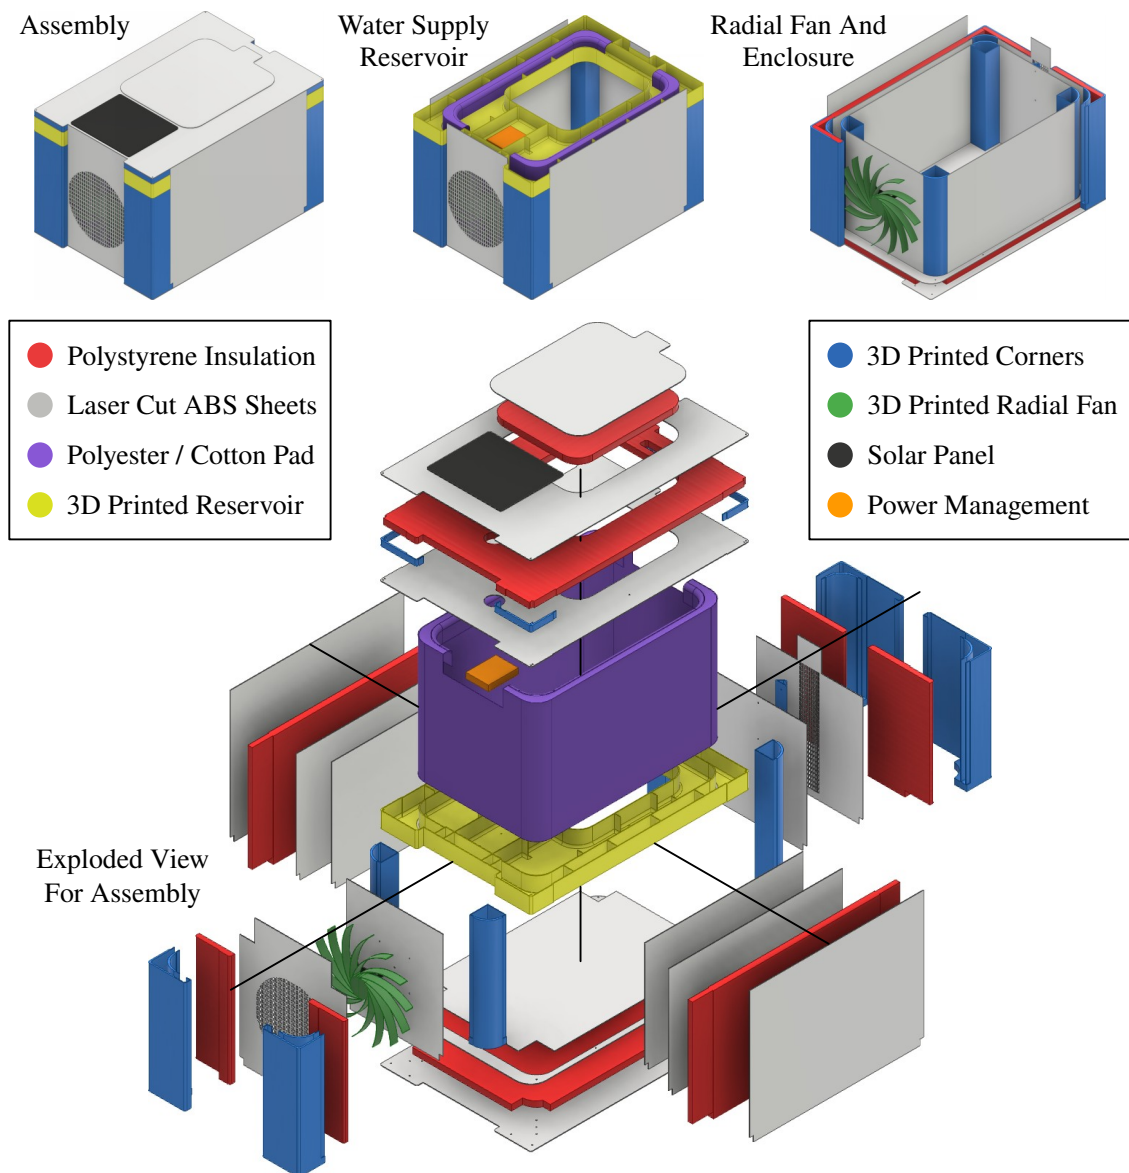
Rendering of the construction of the overall assembly with the exploded view.
